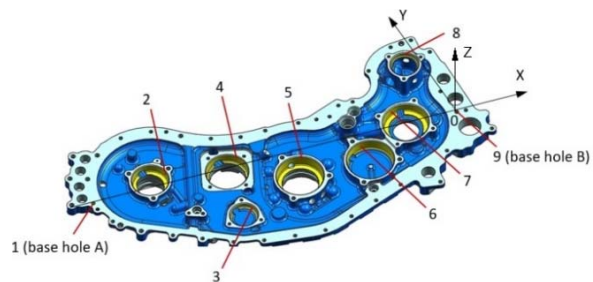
AGB casing cover with marked base holes and bearing seats (in yellow) and reference system.
